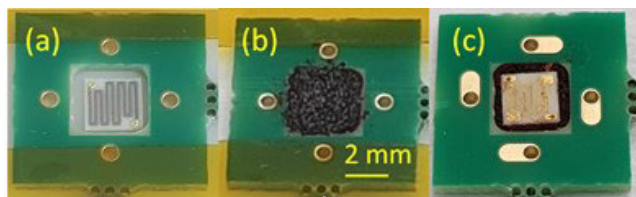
Photographs of the sensor mounting on PCB: the sensor die upside down on the PTFE carrier in the middle of the PCB opening (a), TIM dispensed on the PCB (b), cured assembly (face up) detached from the PTFE support (c).
